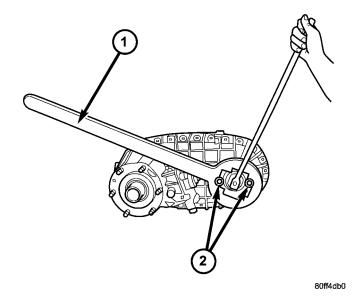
Remove Companion Flange Nut 1 - HOLDER 6719 2 - BOLTS
